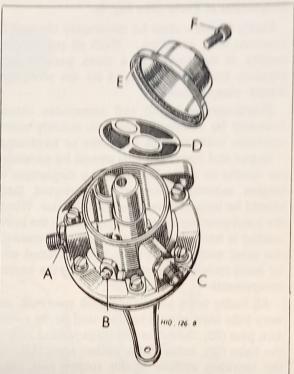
A, outlet union; B, drain plug; C, inlet union; D, filter gauze; E, cork washer; F, cover screw and washer
